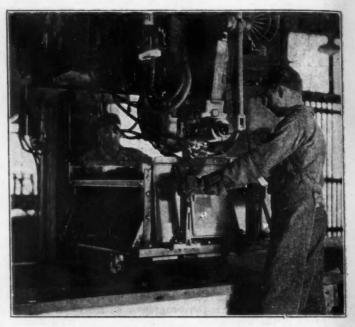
Spot-Welding the Dash to the Shroud
